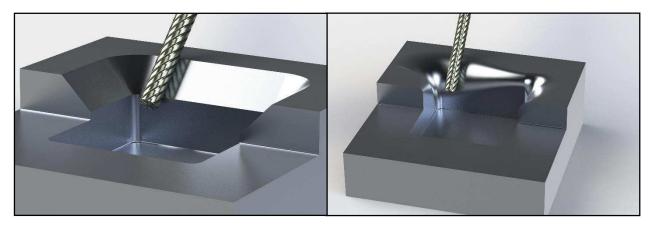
A chamfer, which is possible with a 5 axis CNC mill and an arbitrary variable radius fillet which cannot be exactly machined (though it could be approximated with enough tool passes).
